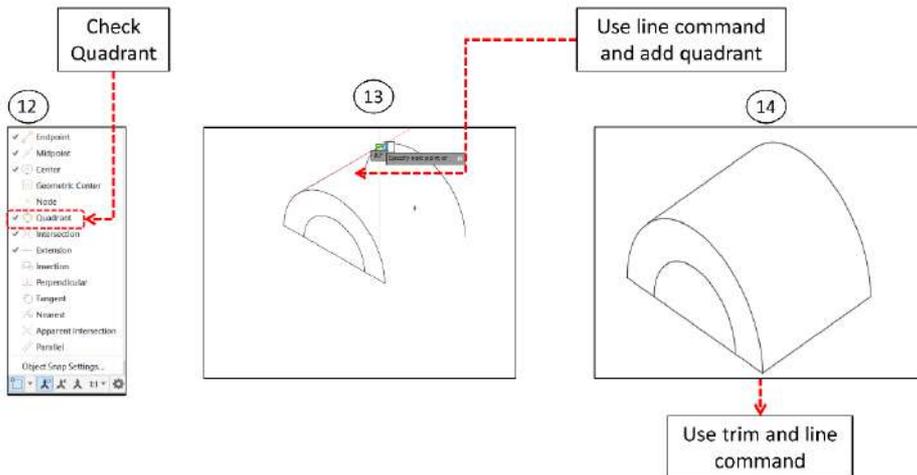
Example of an isometric drawing (Step 12, 13 and 14)
